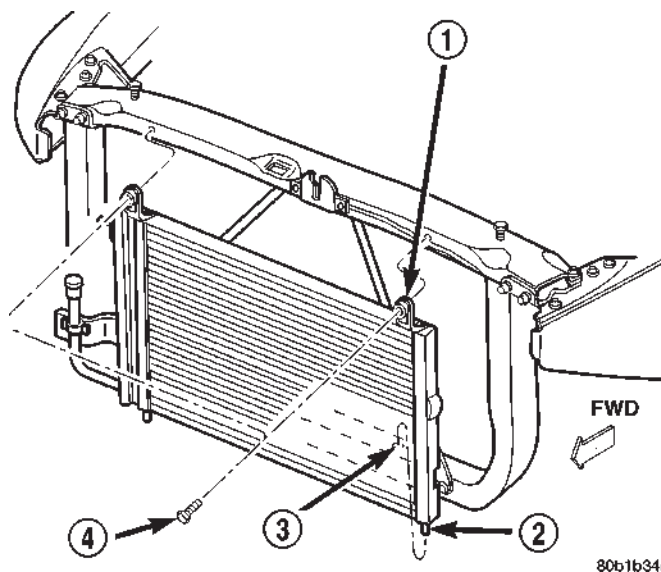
CONDENSER REMOVE/INSTALL - GASOLINE ENGINE
